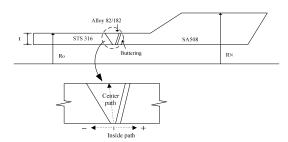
A welding zone of dissimilar metals and the prediction paths in the welding zone for data acquisition [1]
